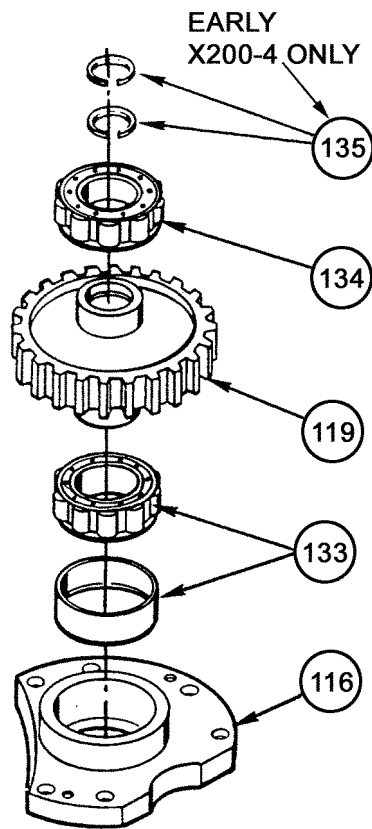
Hydrostatic Pump Idler Gear and Bearing Retaining Plate. (Repeated)
